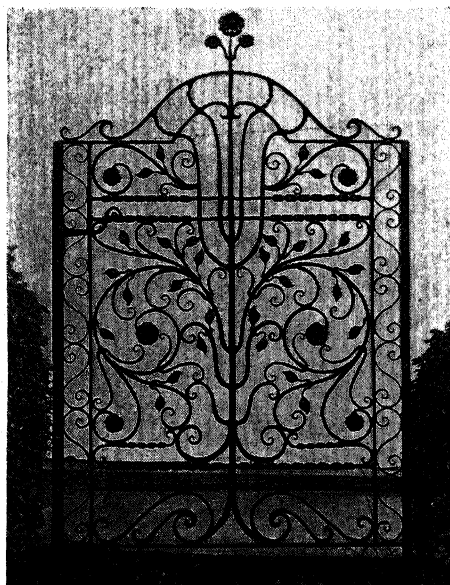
The 108 welds required in the assembly of this garden gate were made by one man in seven hours. No bolts or rivets are used.
